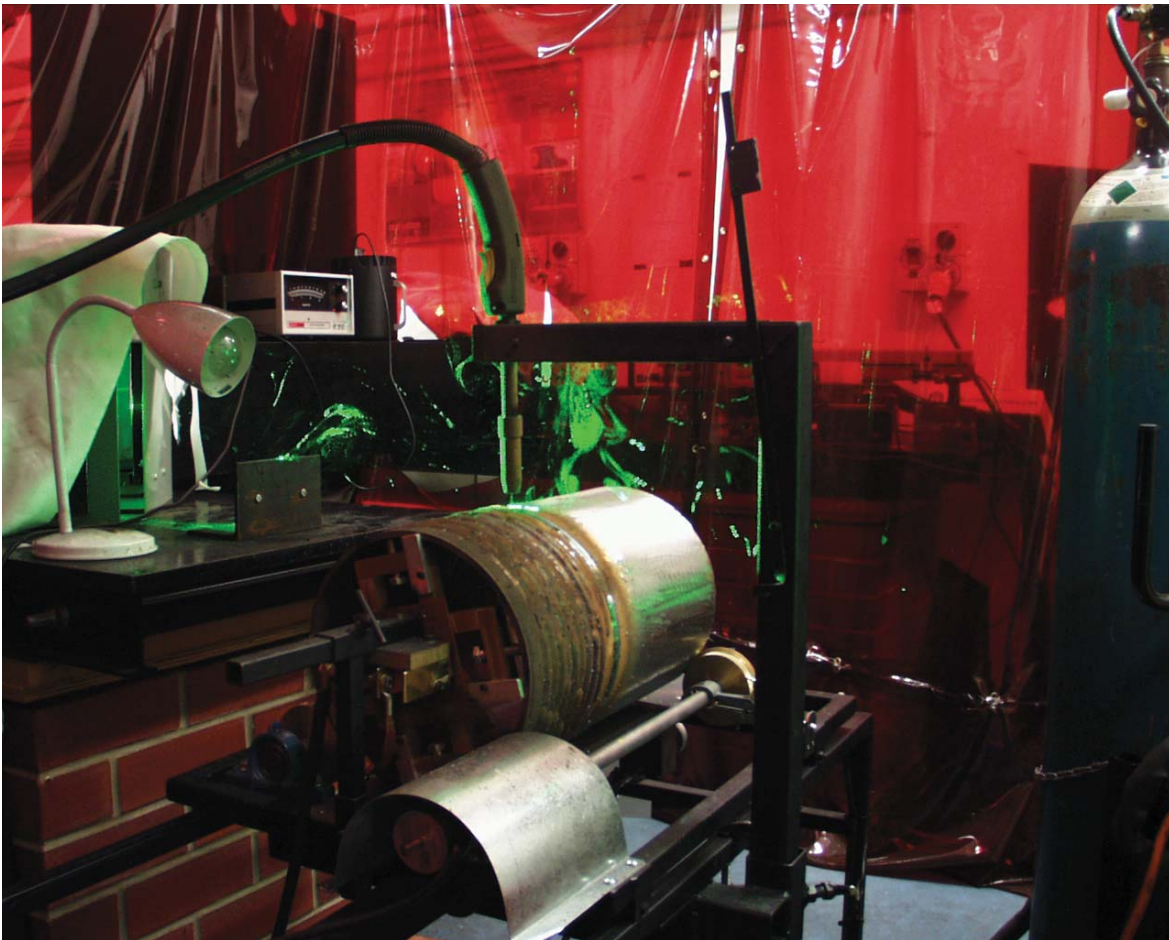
Photo of welding rig during the laser scatter experiments
